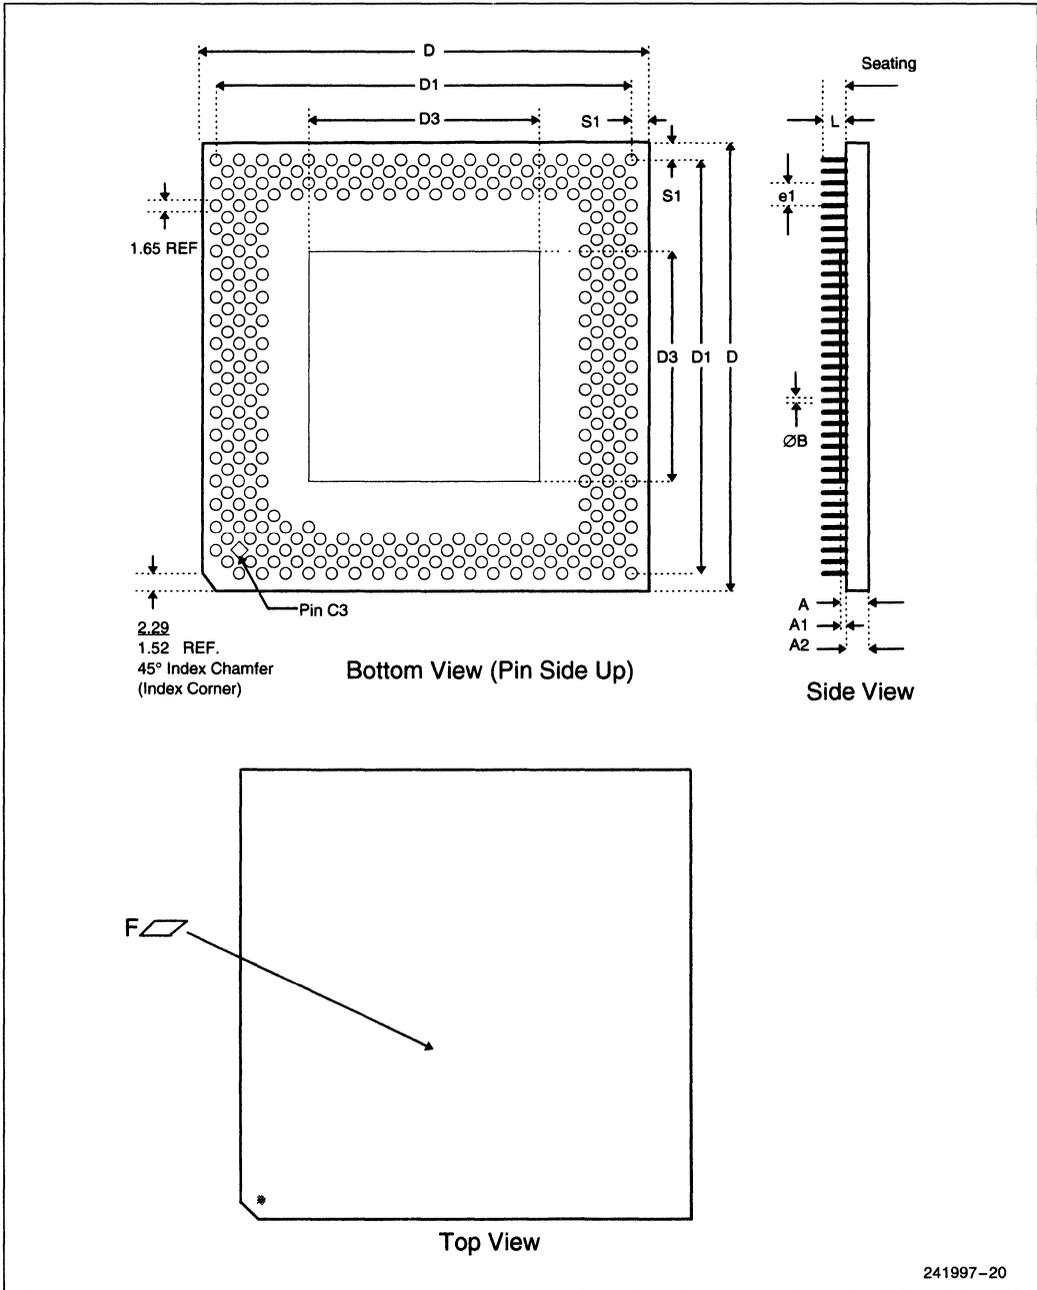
Pentium® Processor 75/90/100/120/133 Package Dimensions (with Spreader)
